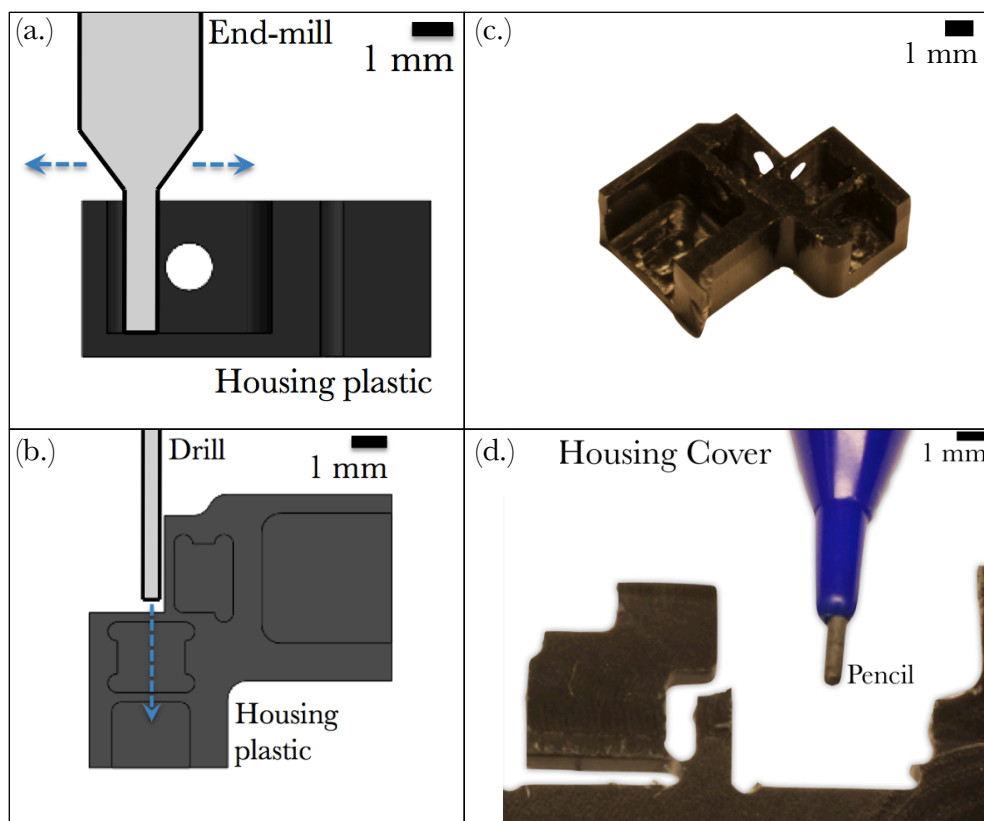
Fabrication of the optical housing and cover. (a.) Schematic detailing sequence for fabricating the housing with a CNC mill. (b.) Schematic detailing sequence for drilling pinholes. (c.) Finished optical housing. (d.) Housing cover shown attached to the plastic sheet after milling (connection is severed when the cover piece is needed).
